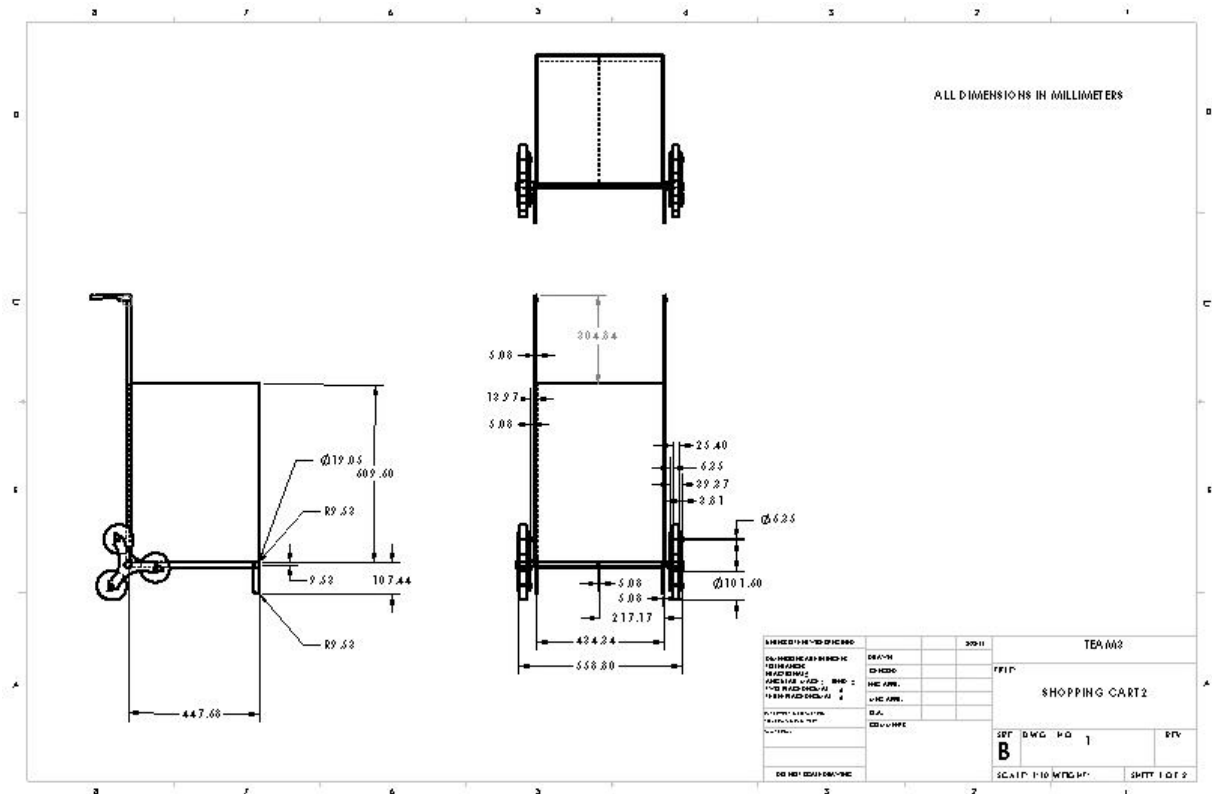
Tri-Wheel Technology Folding Shopping Cart Dimensioned Drawing
